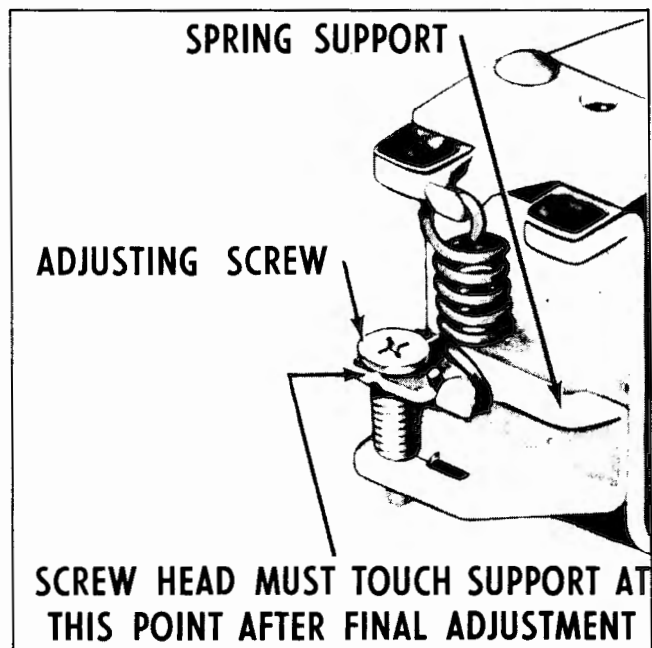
Proper Relationship of Spring Support and Adjusting Screw
